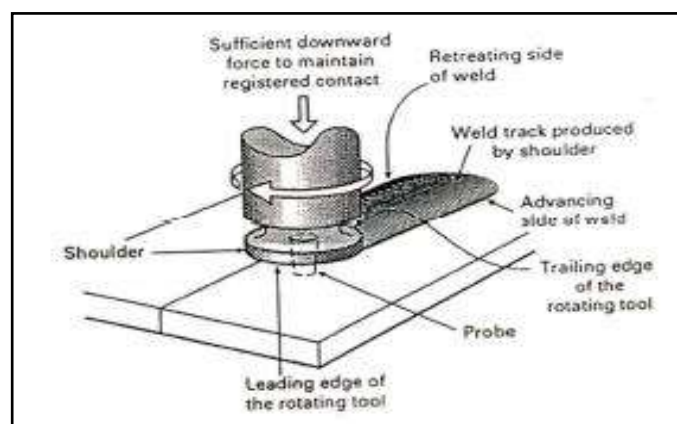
Schematic illustration of Friction Stir Welding [2]
